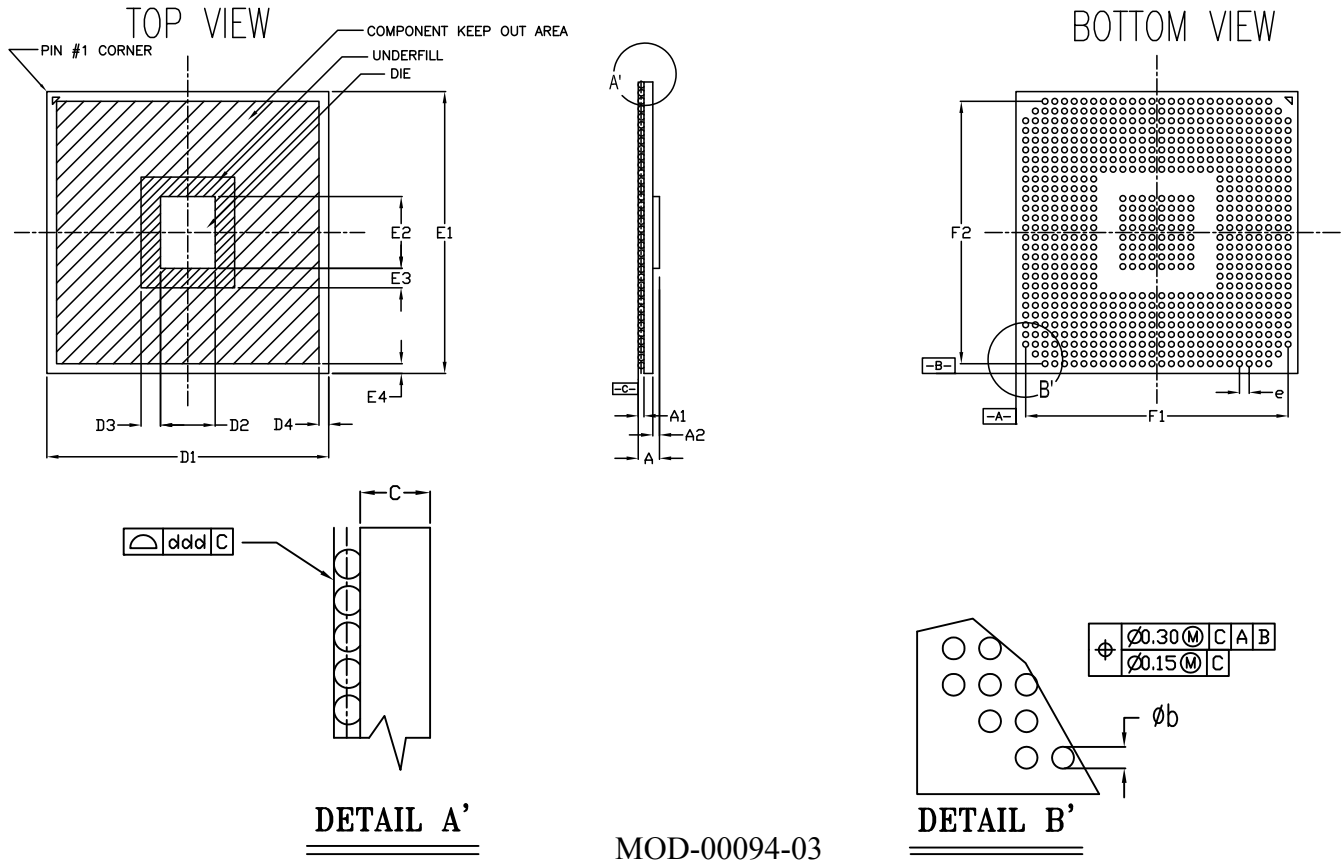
SR5650 692-Pin FCBGA Package Outline
